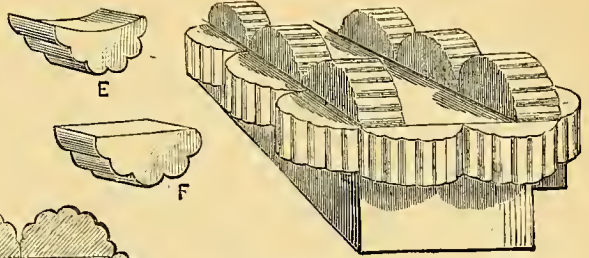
PERSPECTIVE VIEW OF CORK FRAME. E, F, Pieces of cork ready for gluing.
